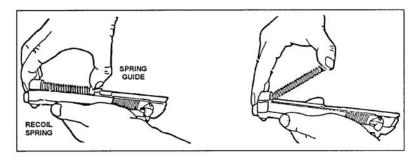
Removal of the recoil spring and spring guide
